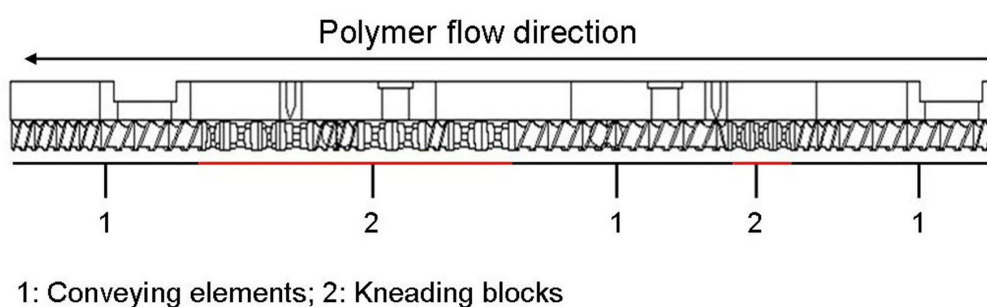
Screw-configuration for Berstorff co-rotating twin-screw extruder.
